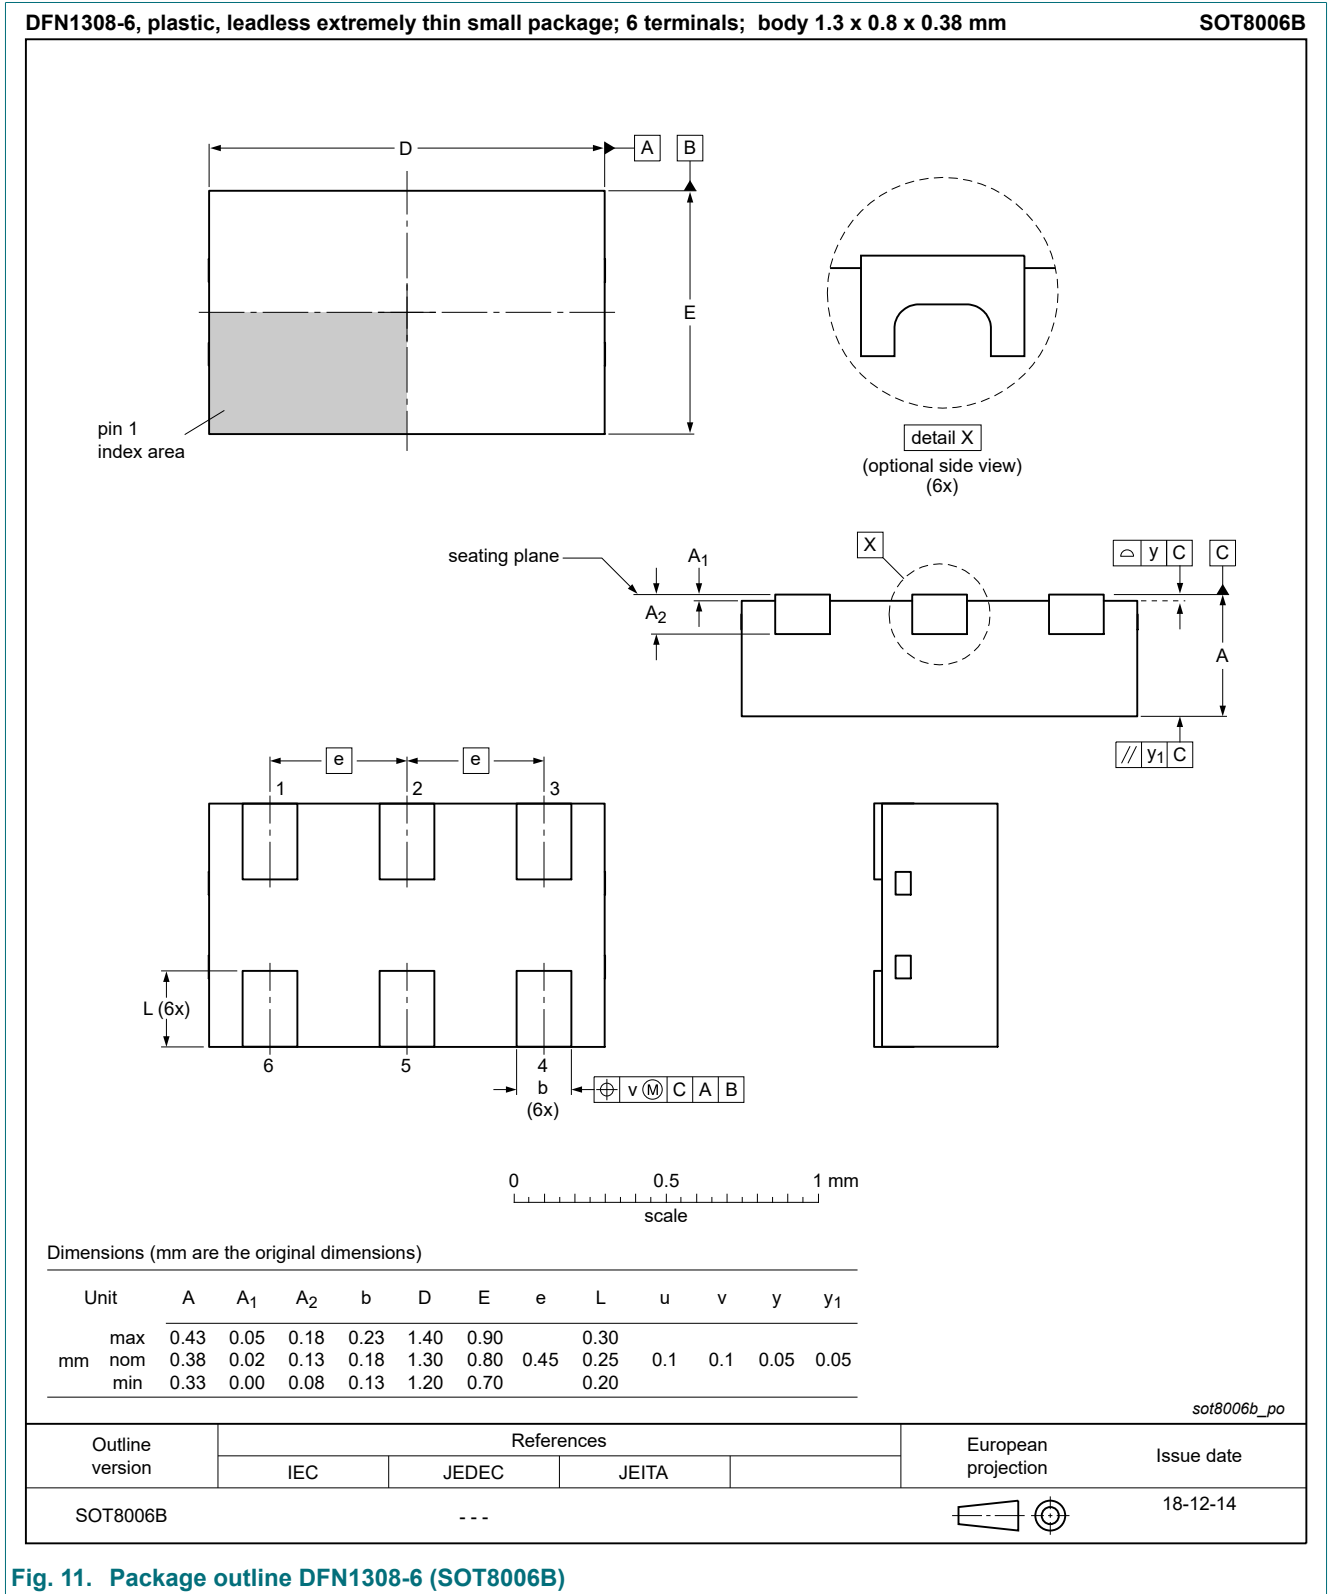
Package outline DFN1308-6 (SOT8006B)
